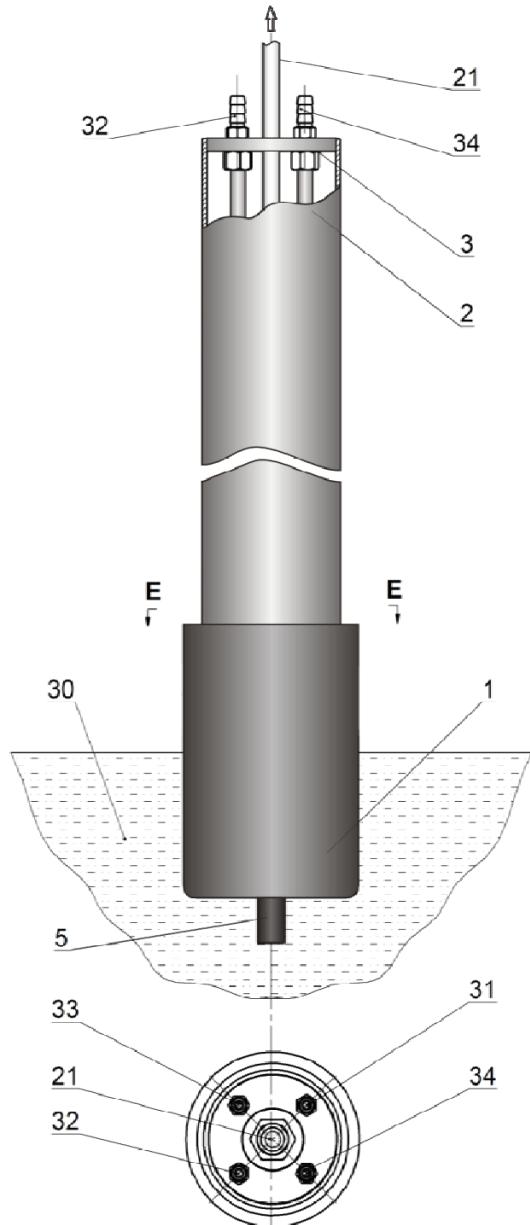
Scheme of new mould for upwards continuous casting of metals and alloys with high thermal capacity: 1-working head (graphite-fireclay cup); 2-support body; 3-collector; 5-graphite casting die; 21-cast aluminium wire; 30-liquid aluminium; 31-orifice "K-in-water"; 32-orifice "K-out water"; 33-orifice "K-liquid cooling agent"; 34-orifice "K-gas".
